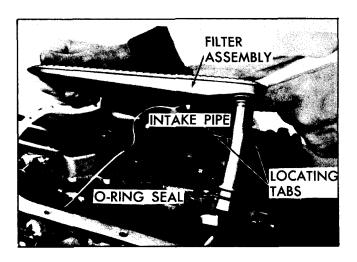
E-212 Installing Filter and Intake Pipe Assembly
